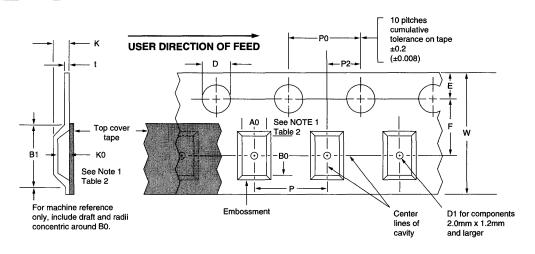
EMBOSSED CARRIER DIMENSIONS (24mm tape only)
